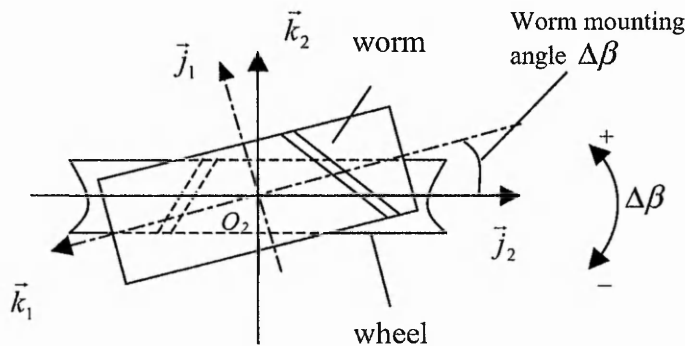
Worm gear drive with misalignment in worm mounting angle
